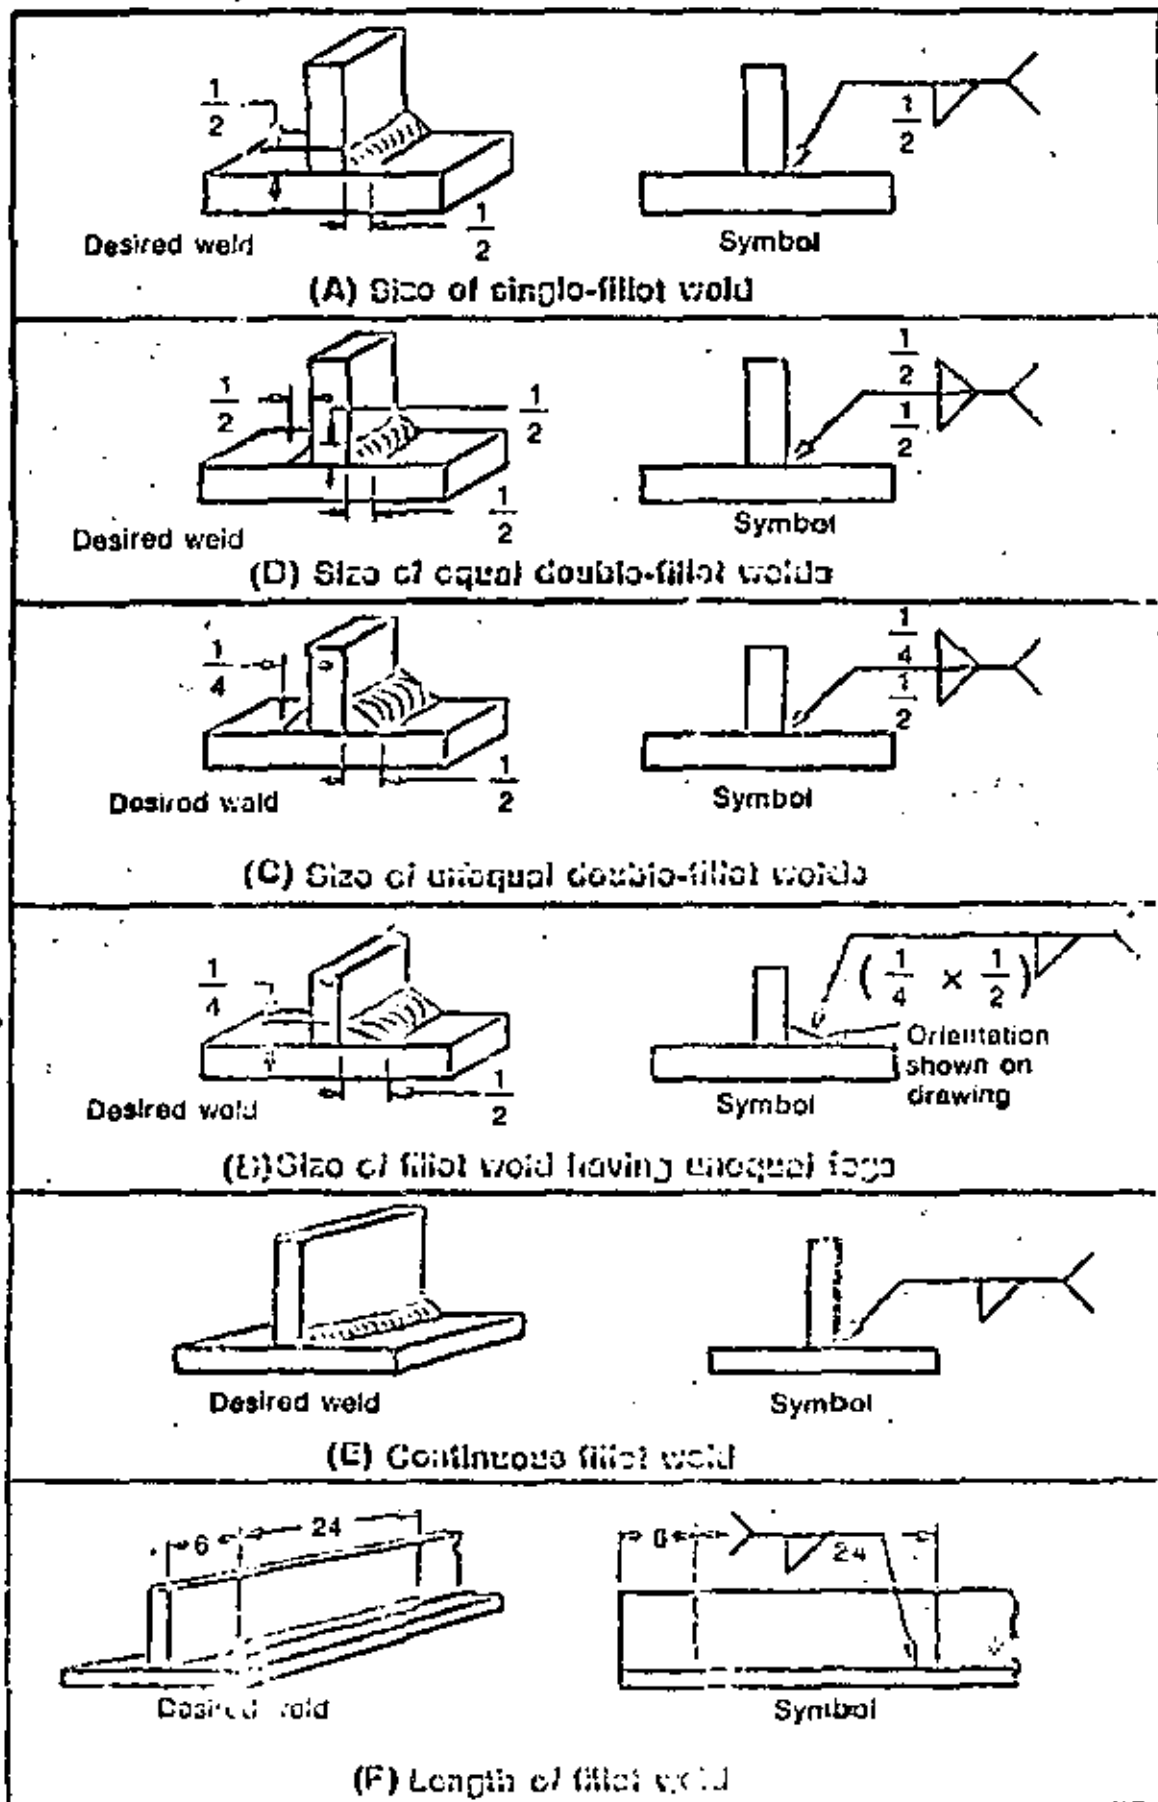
Application of dimensions to fillet weld symbols.
